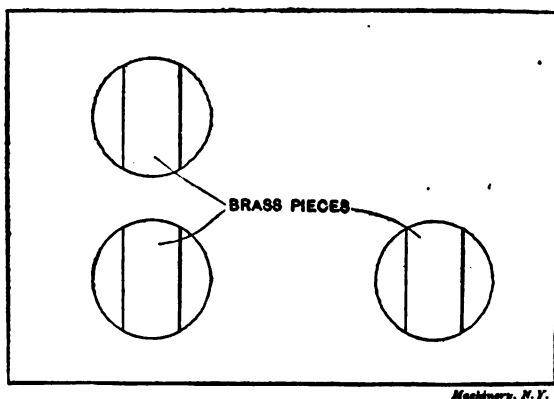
Cored Holes with Inserted Brass Pieces for Centers
